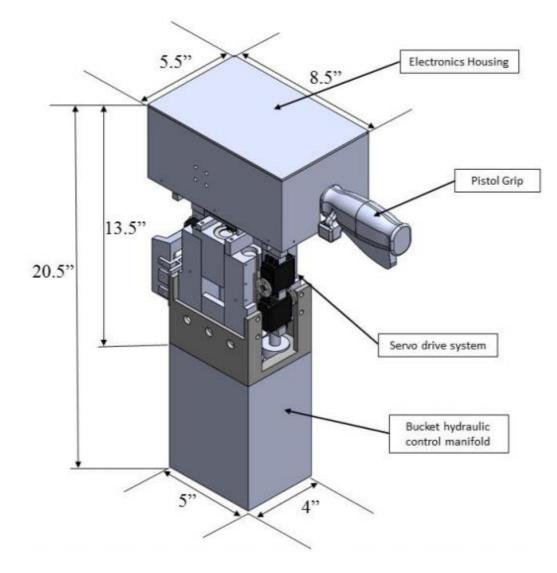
Pistol grip CAD shown attached to hydraulic system. (Marklin et al., Electrical Power)
